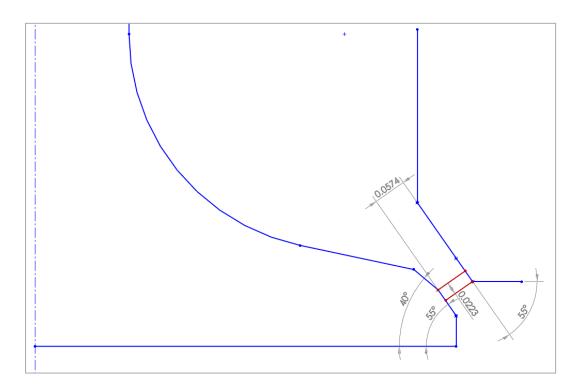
Drawing of the 55° valve and seat opened at 0.1 inches
